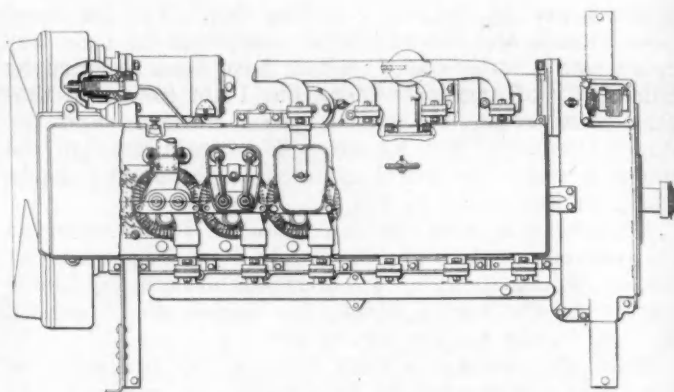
PLAN VIEW OF THE ENGINE ASSEMBLY
